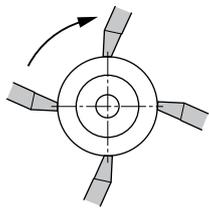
Checking the axial alignment with a calliper gauge – circumferential check
